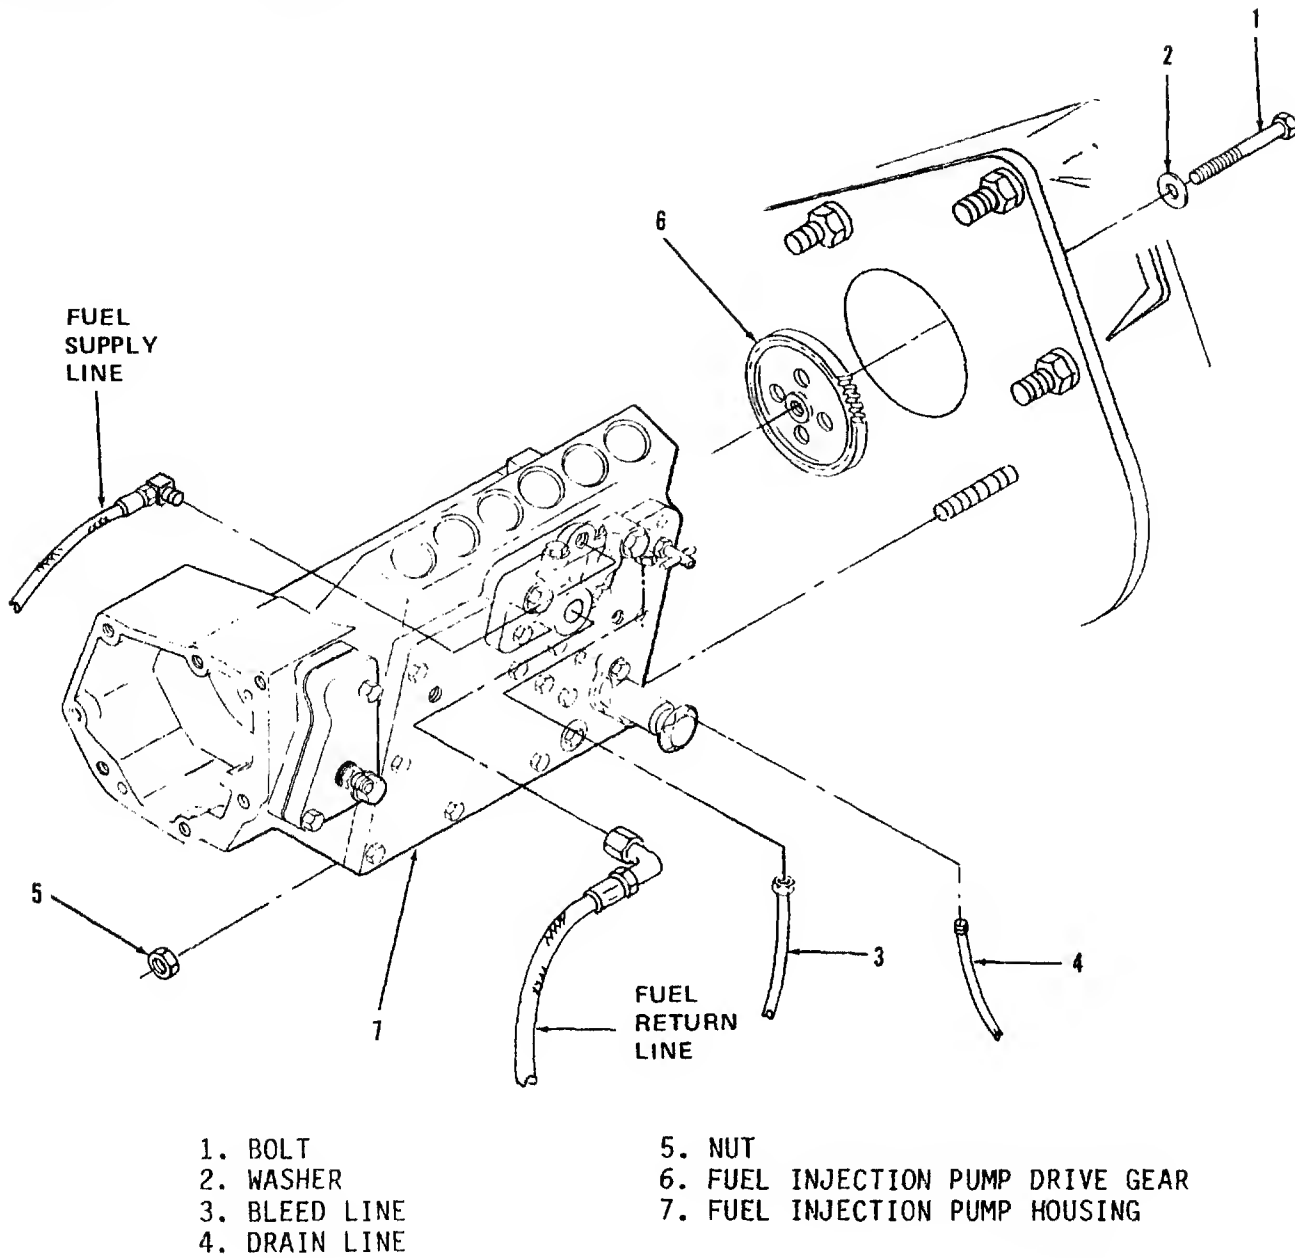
Fuel Injection Pump Housing, Removal and Installation
